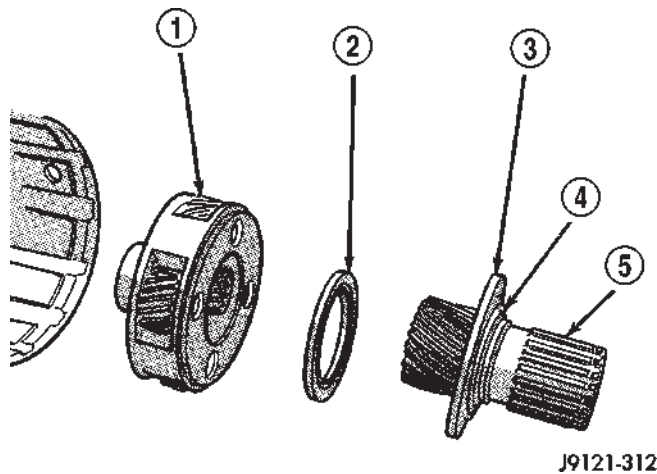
Removing Sun Gear, Thrust Bearing And Planetary Gear
